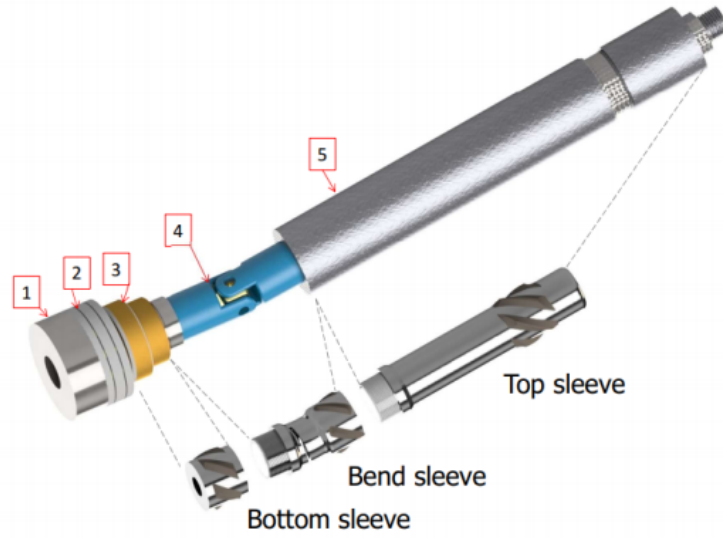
The BHA with the motor shaft (1), thrust roller bearing (2), bushings (3), universal joint (4) and pneumatic motor (5). The sleeve is represented next to the components in the figure.
